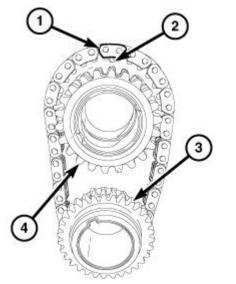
Placing Idler Sprocket Into Timing Chain So That Dimple Is Aligned With Plated Link
